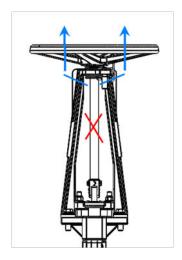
Knife Gate Valve with Handwheel or Chainwheel Actuator, Vertical Lifting
